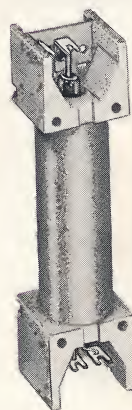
Stress-free assembly of the rugged switch support terminals (Fig. 4.) to the tinned terminal supports (Fig. 2). The switch is first positioned with the rugged terminals cradled in the supports, then securely soldered for positive contact and rigid positioning. This construction completely avoids stresses that are created when the support terminal is bent; stresses that transmit to the contact inside the capsule and seriously affect operating stability.
